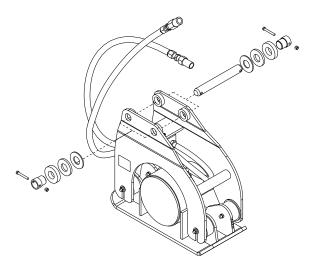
Ho-Pac shown with "XSF" Top Mounting Frame
